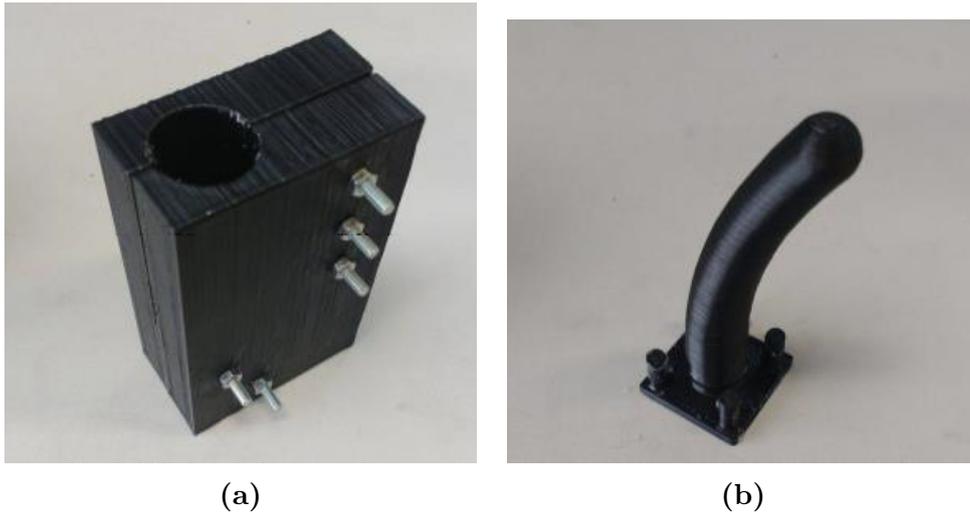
3D printed molds for the Ecoflex curing: (a) Main mold; (b) Shaping mold.
